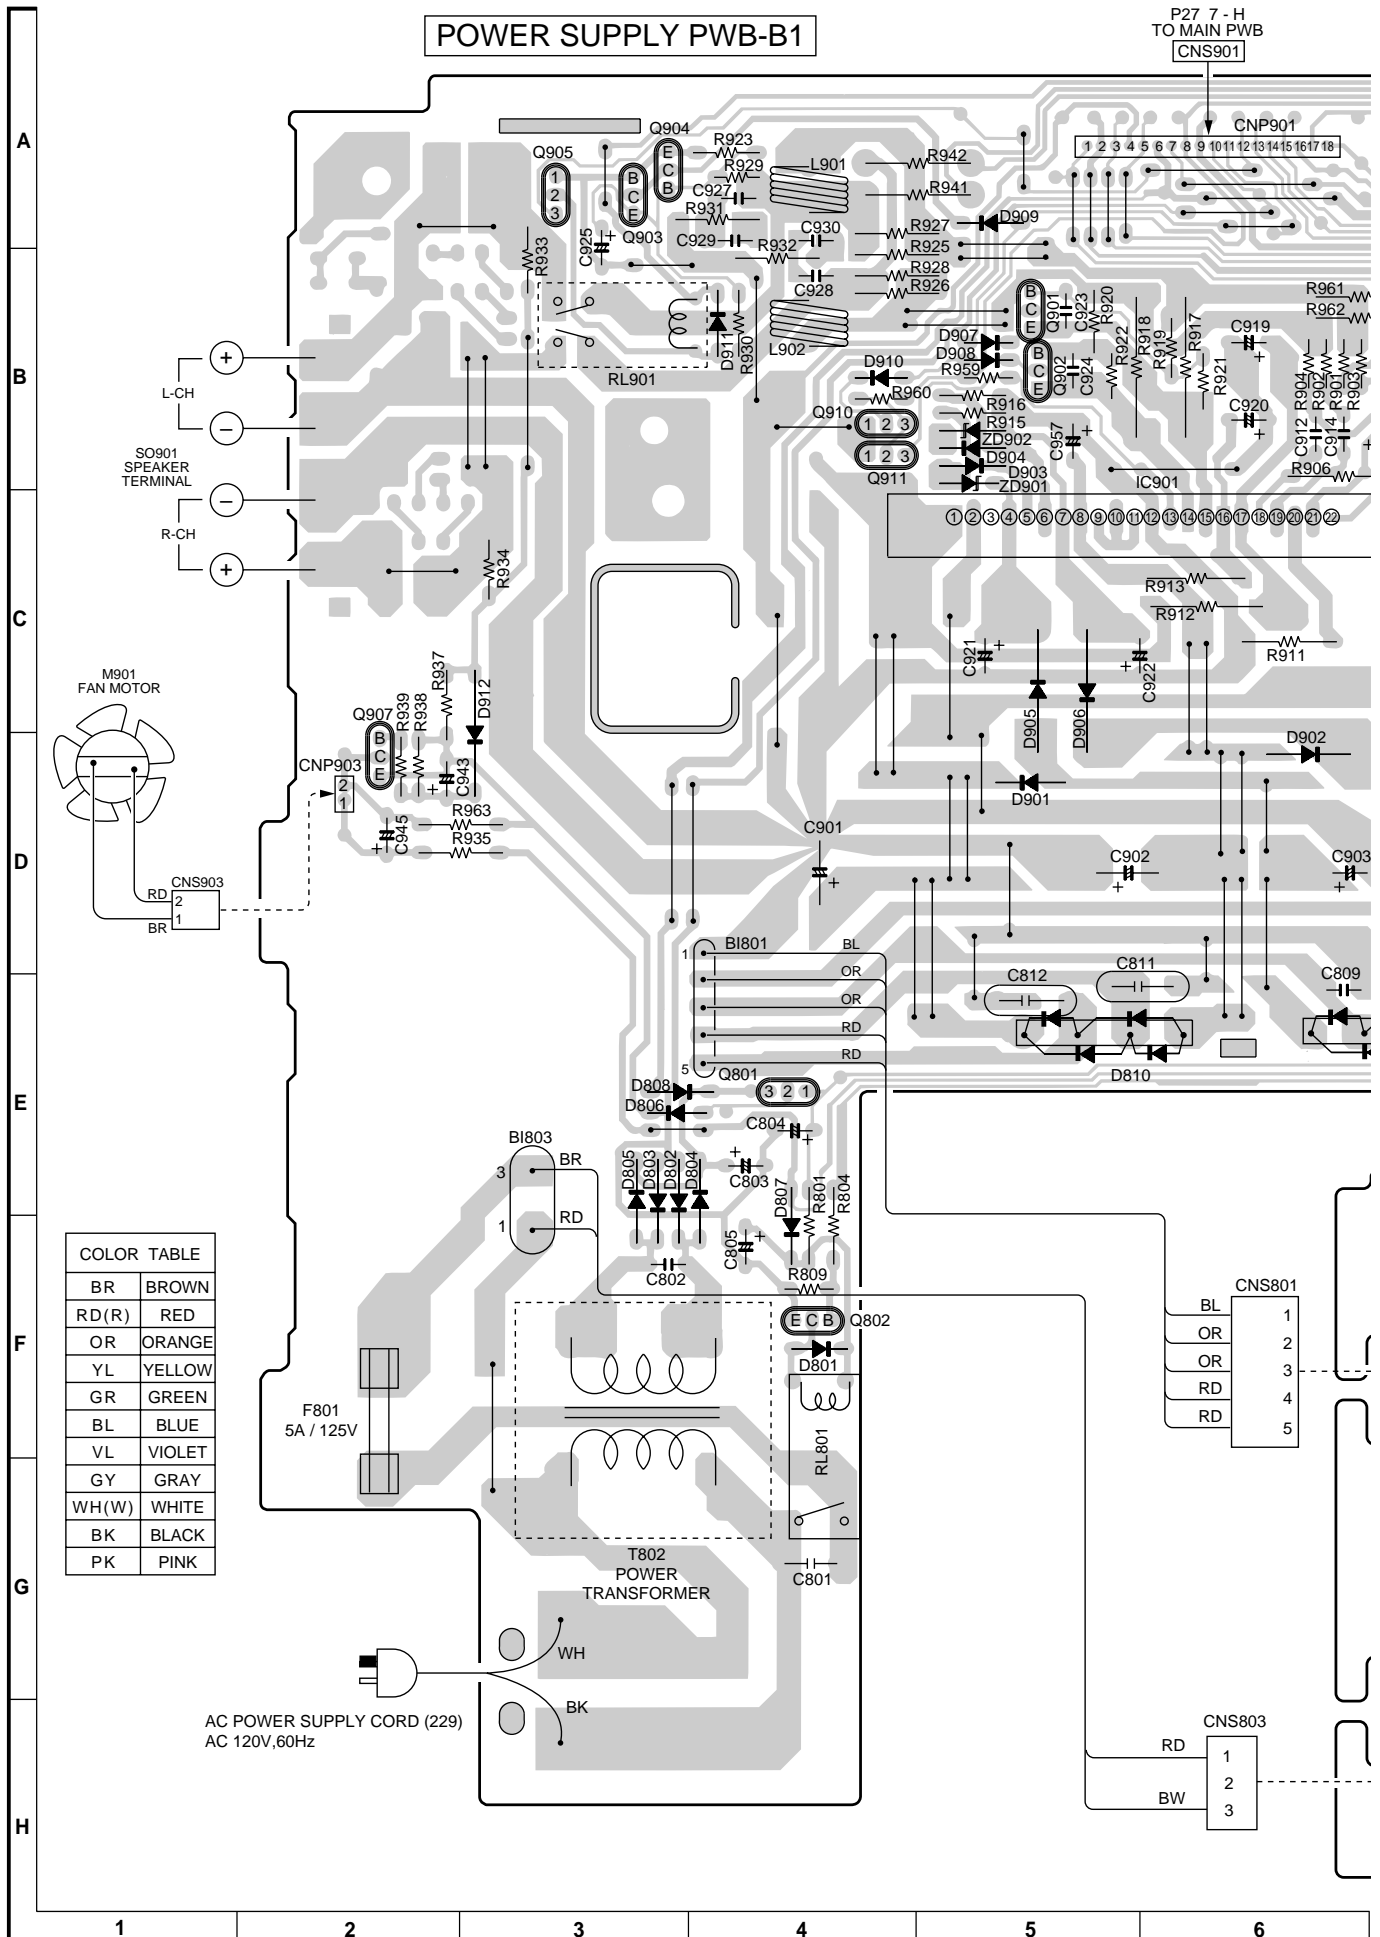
WIRING SIDE OF P.W.BOARD (5/8)
